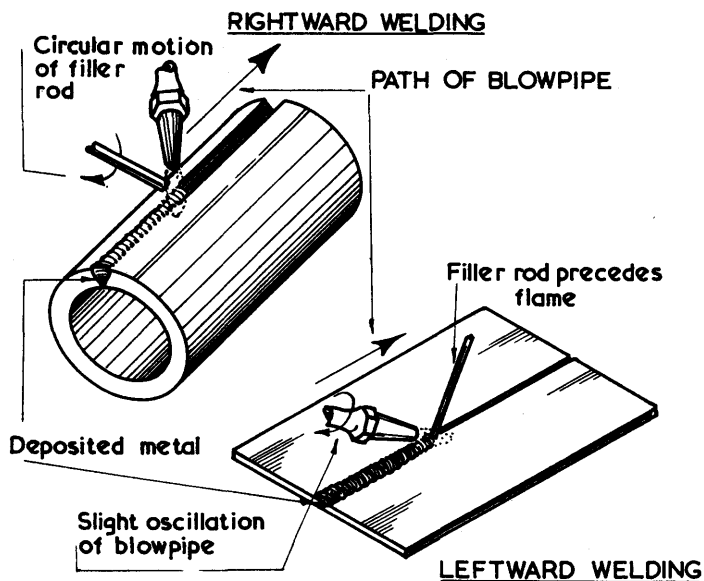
Rightward and Leftward Welding.
